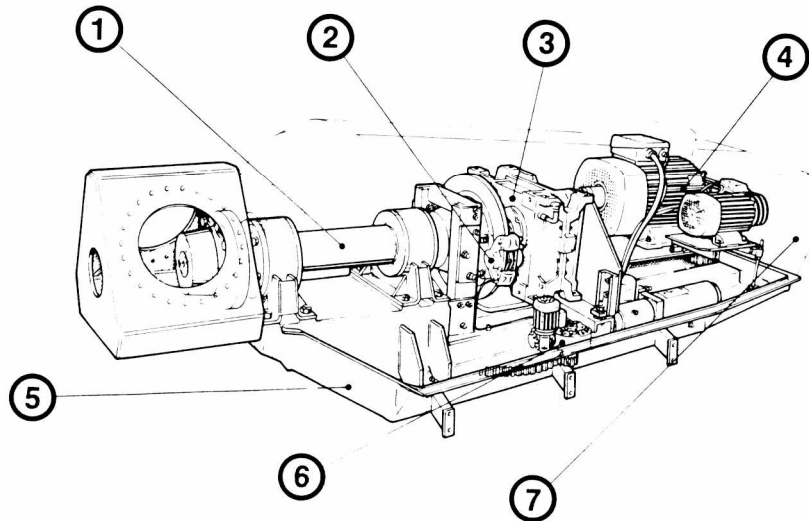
Drive train for typical medium-sized wind turbine. (1) Main shaft. Note that the bearings supporting the main shaft are independent of the transmission. On some wind machines the bearings in the transmission housing support the rotor. (2) Disc brake. Note position on the main shaft. On some wind machines the brake is located on the output side of the transmission. (3) Transmission. (4) Induction generator. Many wind machines, such as this one, commonly use two generators, or they use dual windings on a single generator. (5) Bedplate (frame or strongback). (6) Yaw or slewing drive for pointing the turbine into the wind. (7) Nacelle cover. (Vestas DWT)
